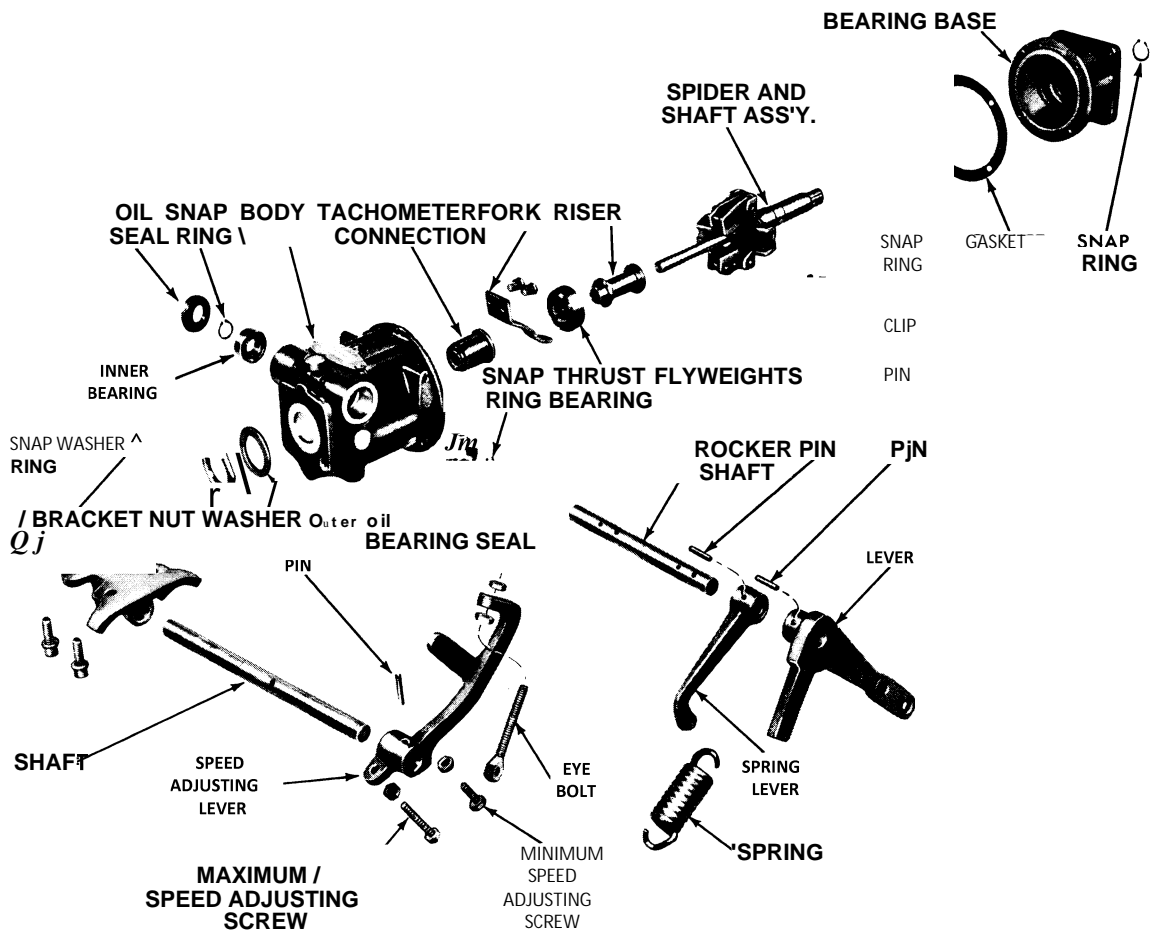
Output Shaft Governor Details and Relative Location of Parts
